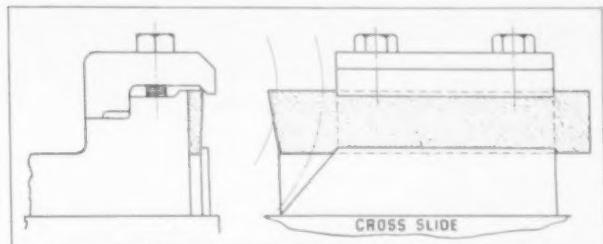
Tool properly supported under cut and rigidly clamped. Tool centered, during cut, but concave grinding as shown at A, Fig. 3.
